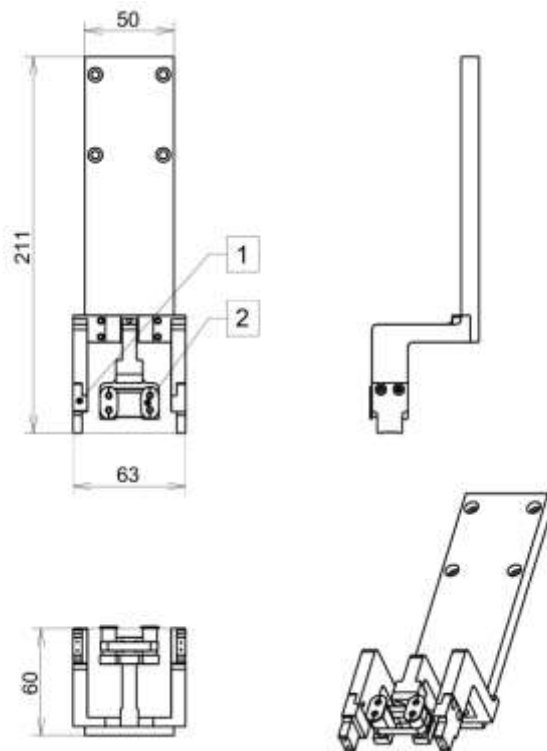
Technical parameters of tape suction mechanism design 1.
